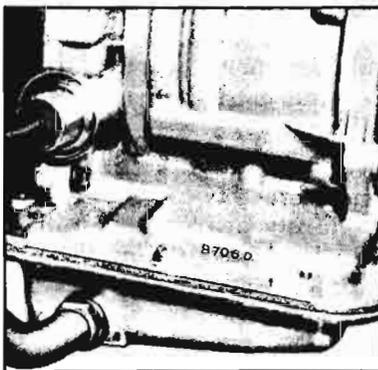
Powerglide transmission unit number stamped on right hand side of casting between forward and middle pan mounting bosses.
